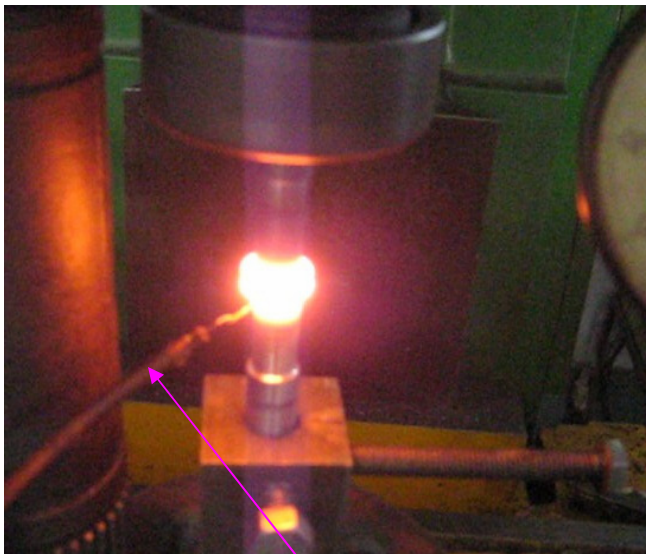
Close view of friction welding process and position of thermocouple
